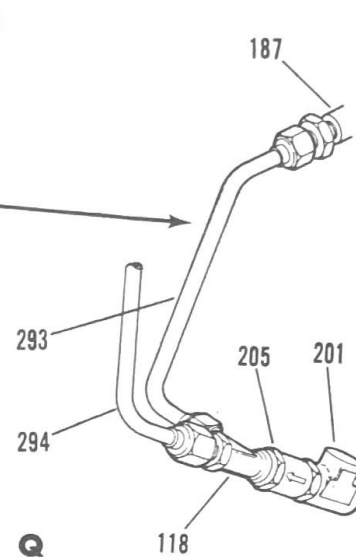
Tailcone Hydraulic Installation (Sheet 3 of 4)
